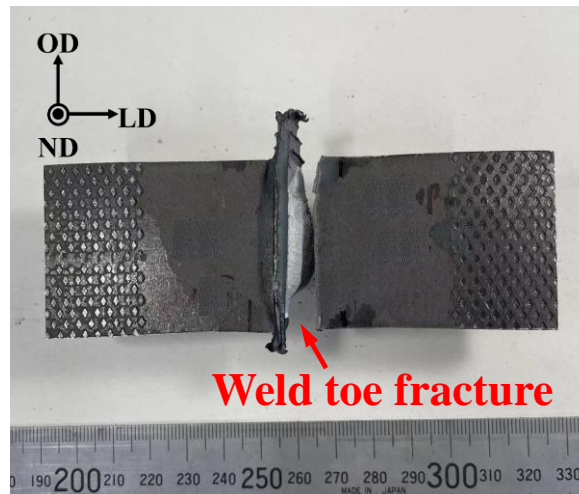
Fractography characteristic of a weld toe fracture.
